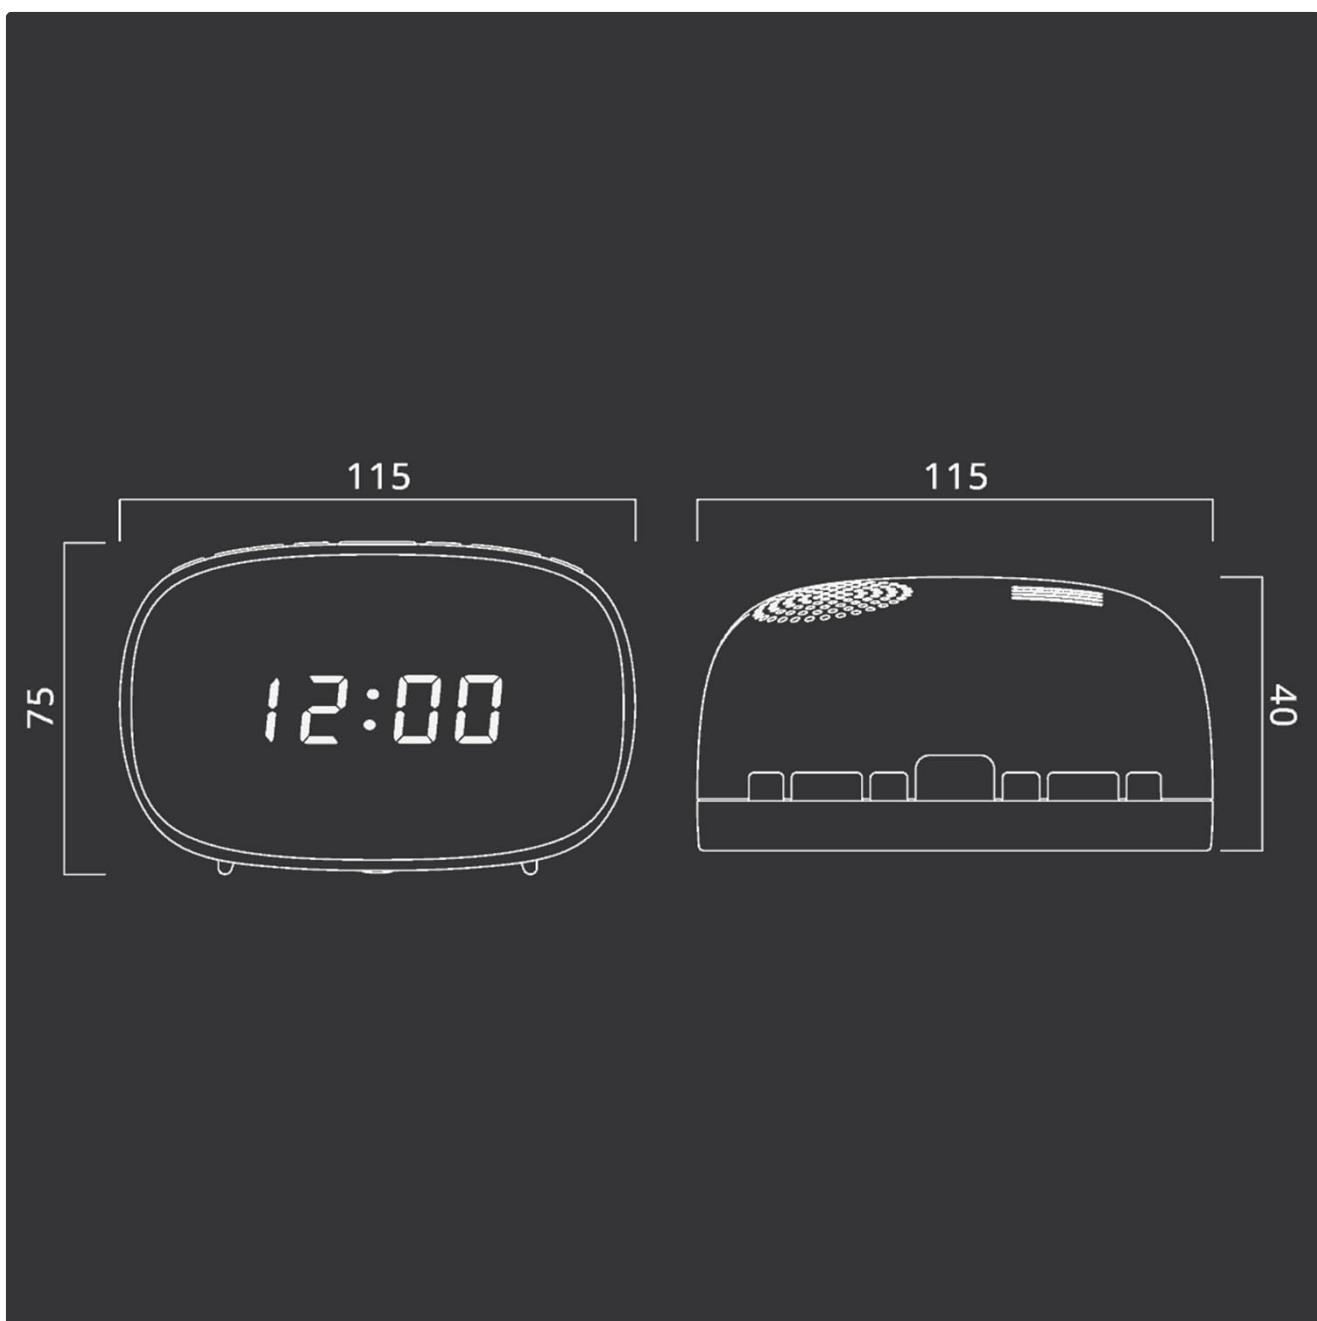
Technical drawing showing the dimensions of the Muse M-150CR Clock Radio.
